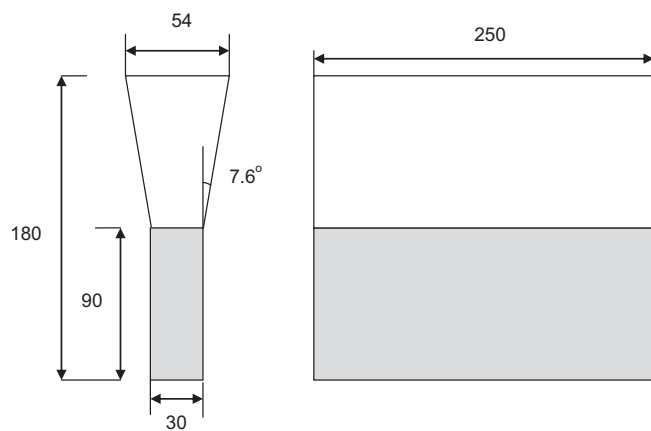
Dimensions of the Y-block castings used in this experiment. Test specimens cut and machined from the lower part of the Y-block (dimensions in mm).
